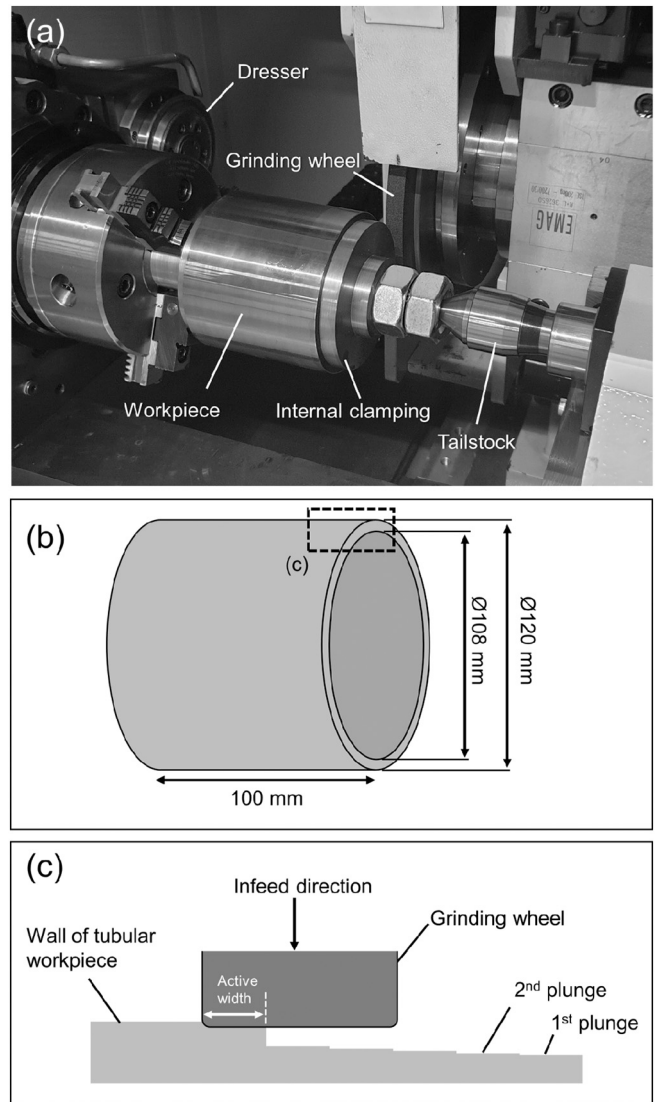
Experimental setup of grinding tests (a), workpiece geometry (b), and setup during wheel wear tests (c).
